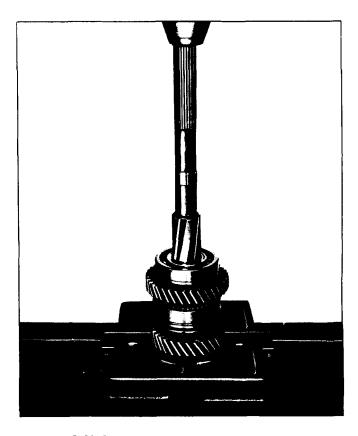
D-25 Pressing Mainshaft from Rear Bearing, 1st Speed Gear, 1st & 2nd Speed Synchronizer Assembly and 2nd Speed Gear
